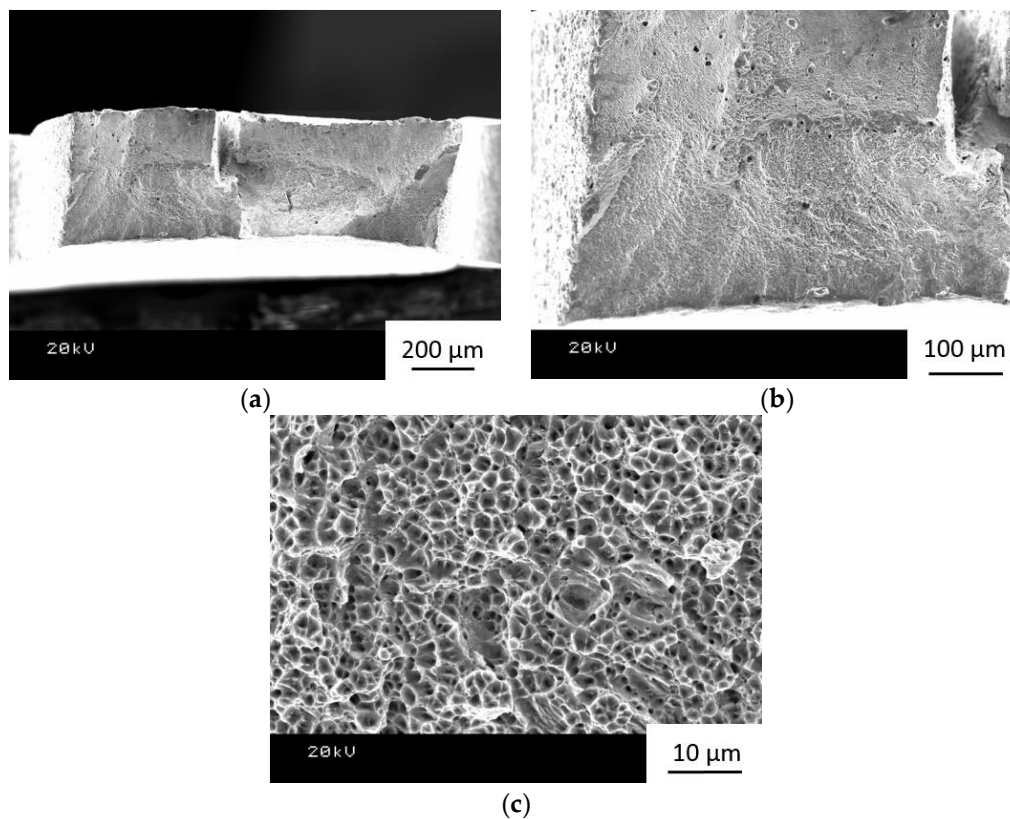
Fracture surface of 13_1 specimen: (a) View of the entire fracture surface; (b) Predominantly ductile fracture; and, (c) Ductile dimpled fracture region.
